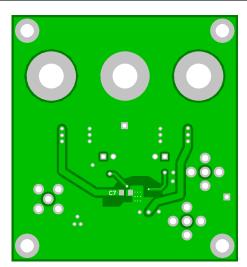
THS3091 EVM Board Layout (Bottom Layer)
